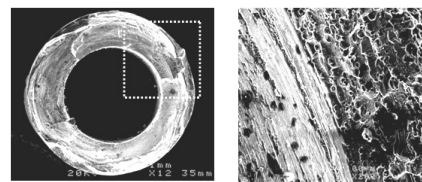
SEM fractography of BMG side specimens after 4-point bending test of friction weld specimens of Vit-1/A5083
